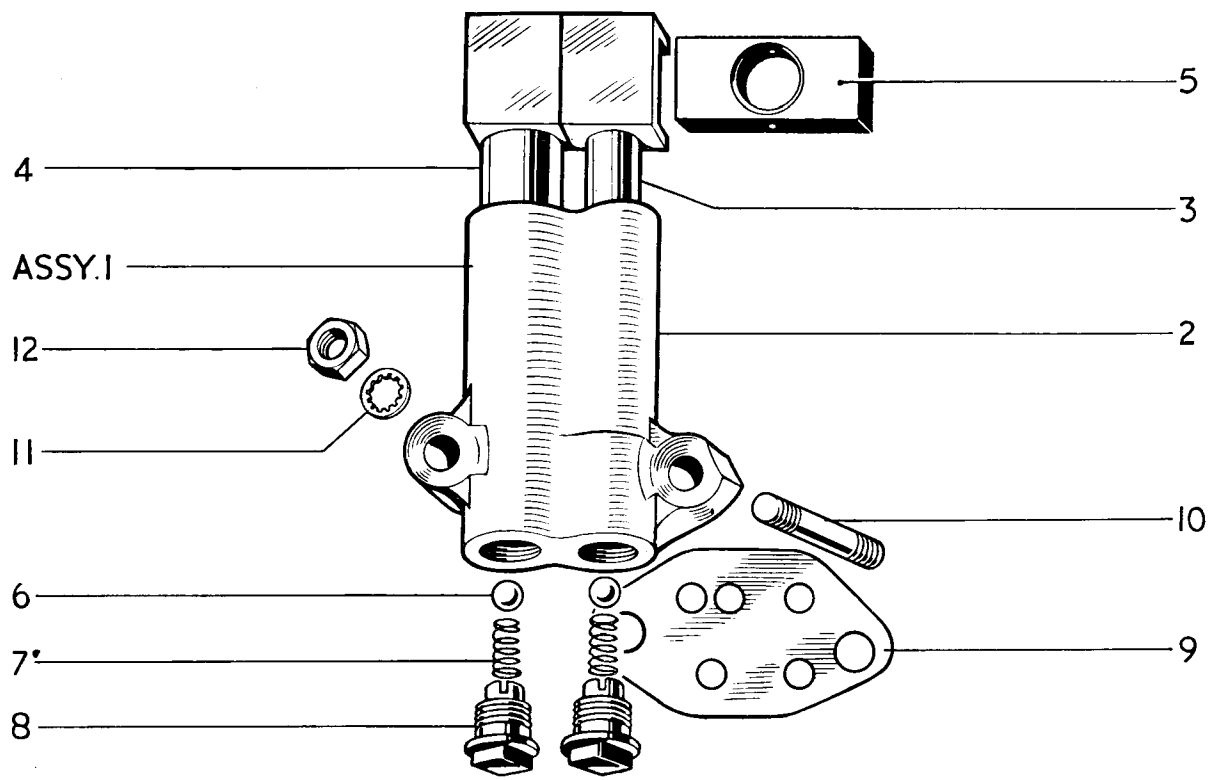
OIL PUMP AND RELEASE VALVE AND MANIFOLD
